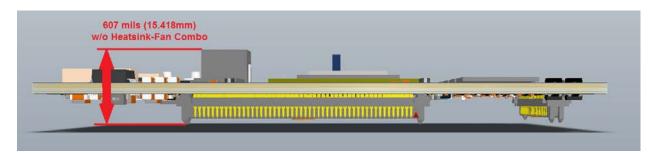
UltraZed-EV SOM Side View Mechanical Dimensions
